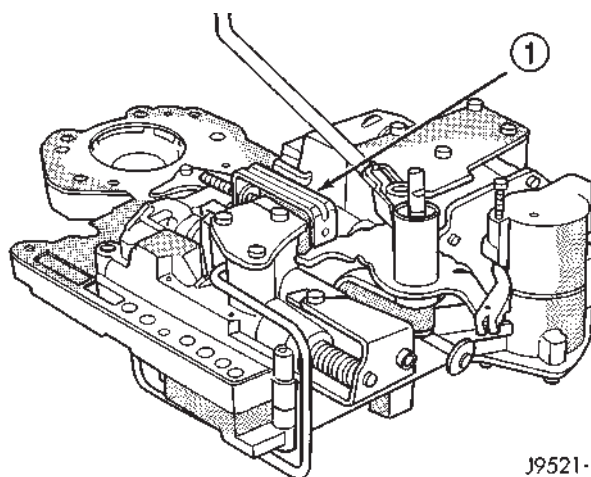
Seating 3-4 Accumulator On Lower Housing
